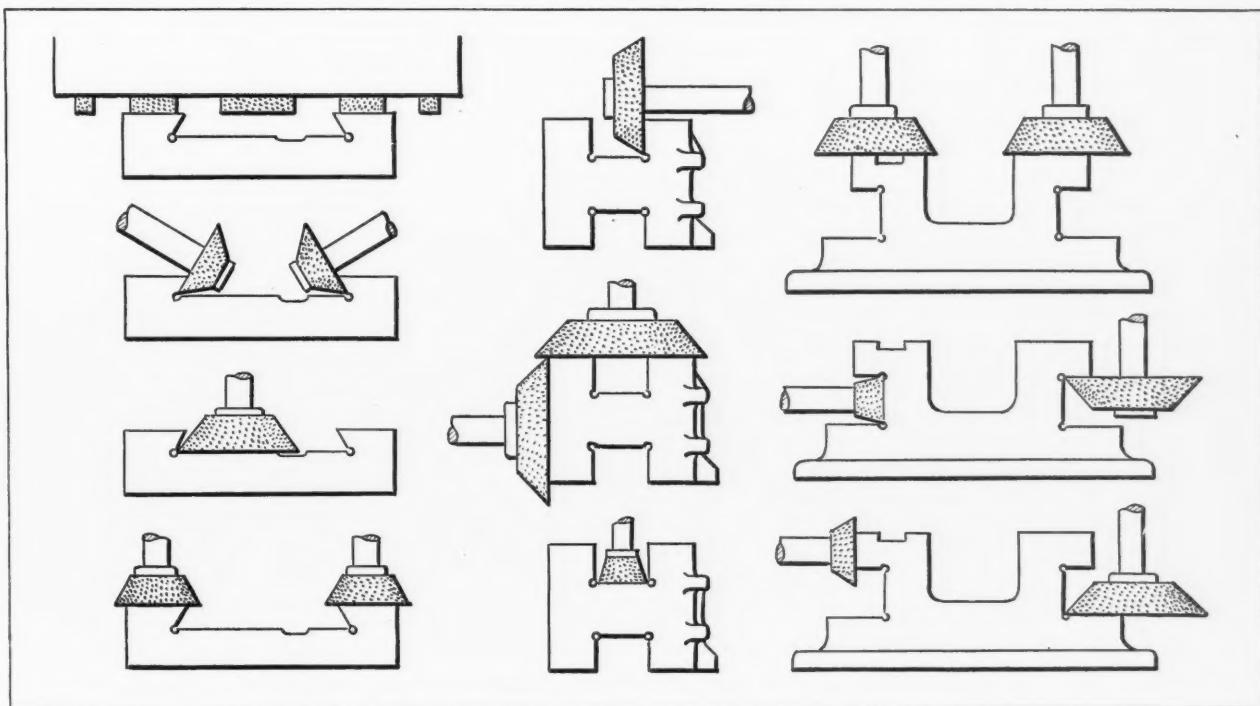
Typical Examples of Work Done on Way and Slide Grinder
